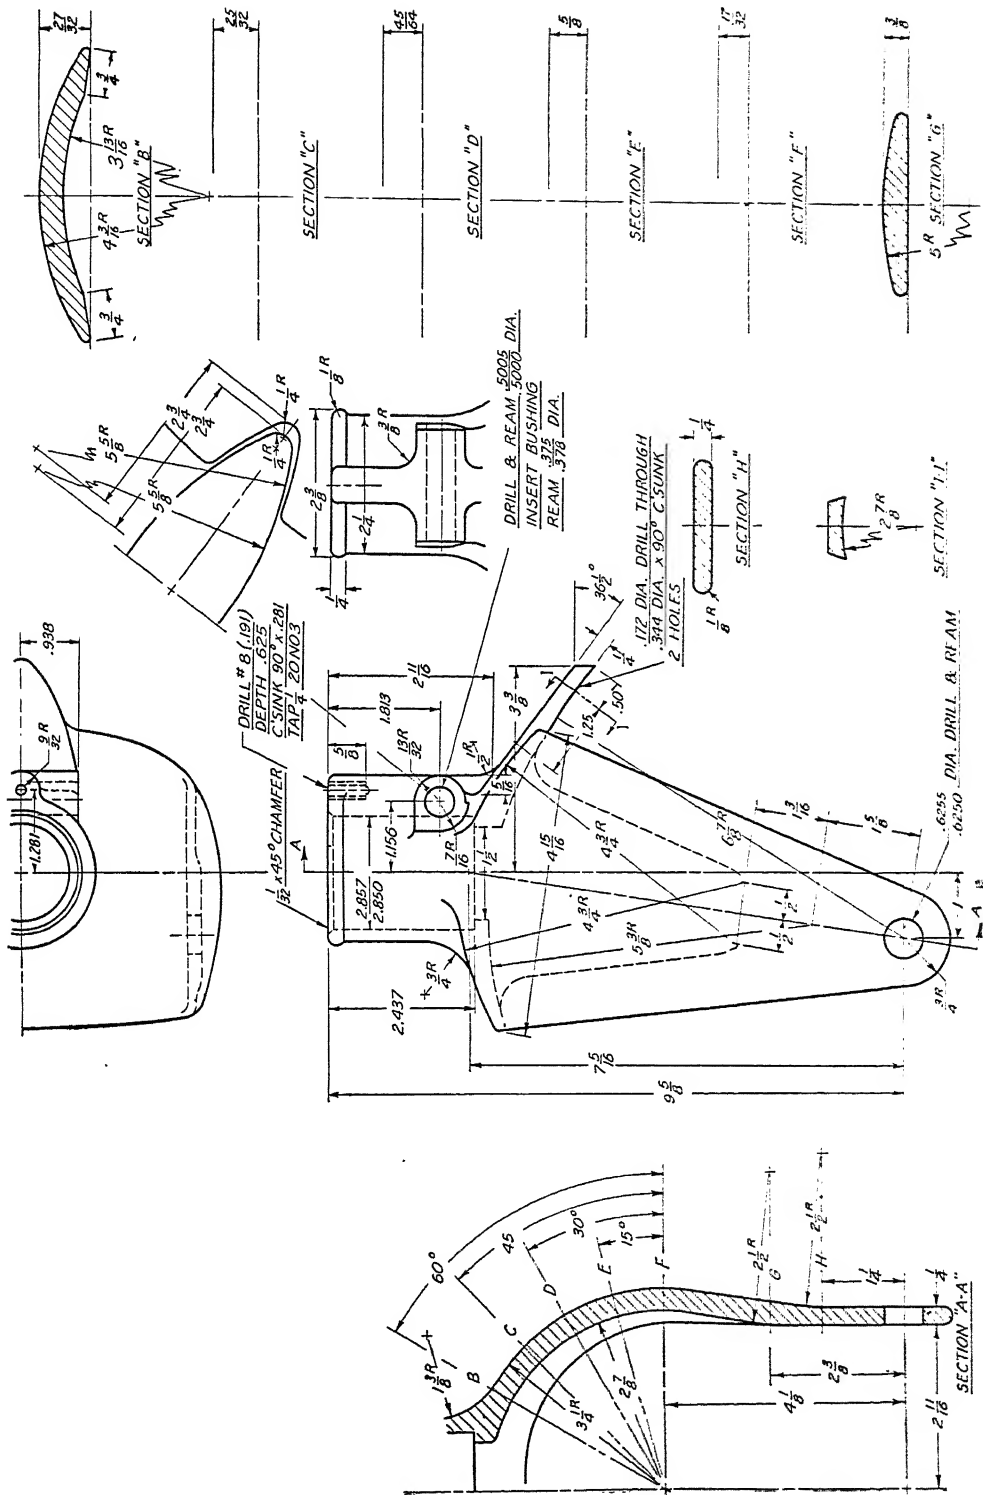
Rudder Assembly. Prob. 14-7.
